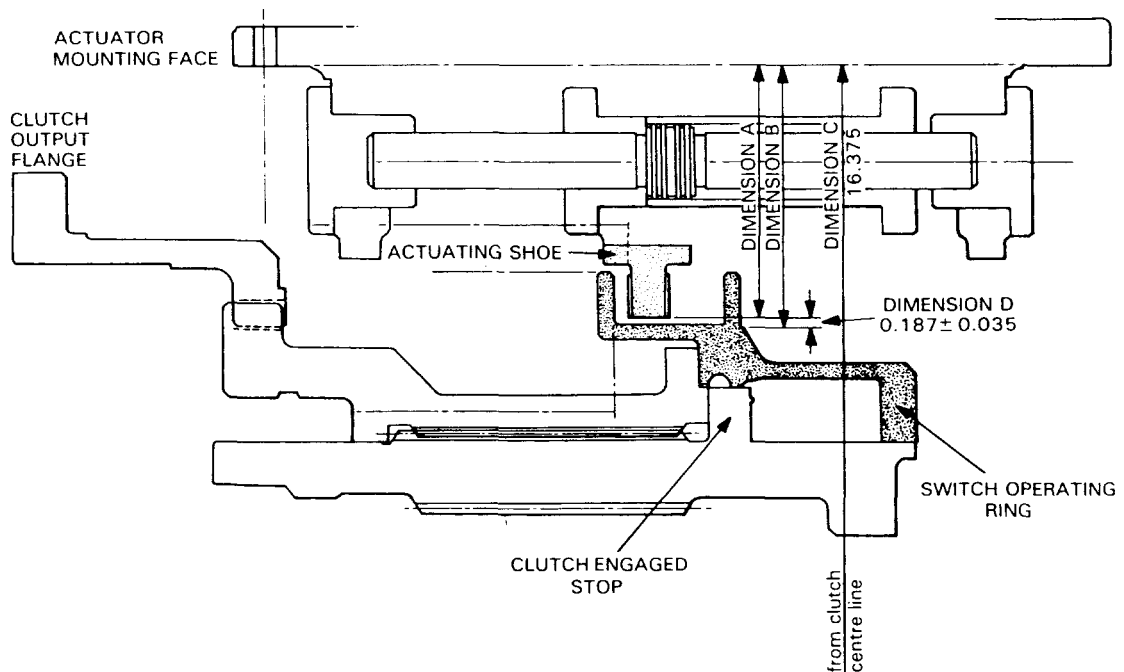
SSS CLUTCH AND ACTUATOR, IN ENGAGED POSITION
